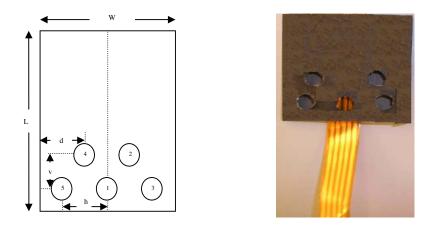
Front end mechanics: Drawing (left) and Tether assembly (right)
